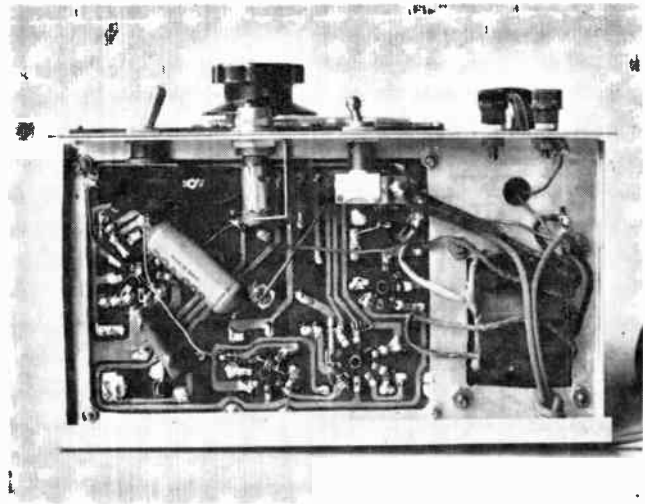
Bottom view. A few components have been wired to the bottom of the circuit board to facilitate construction.
